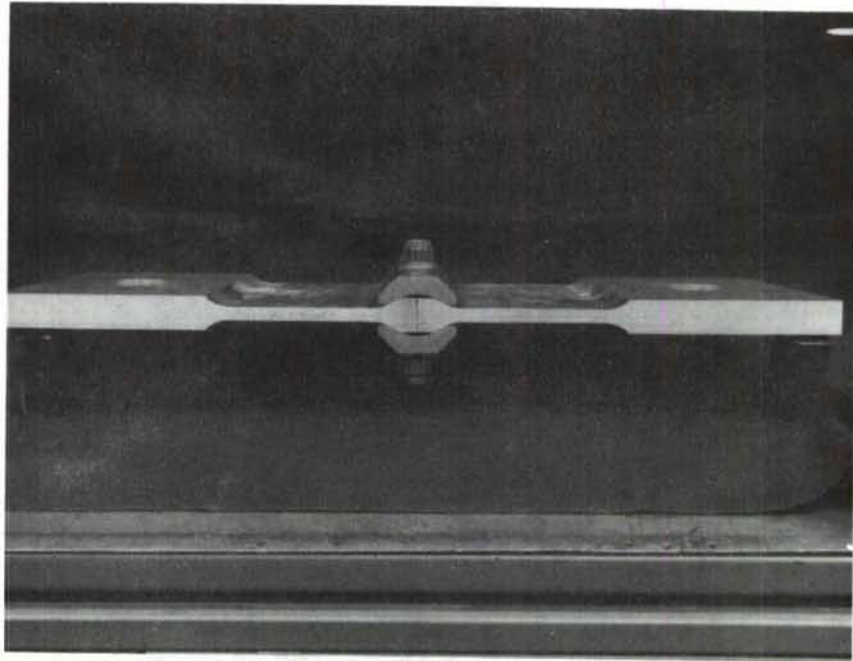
CLAMPED CHORDWISE SPLICE TENSION TEST SPECIMEN (ADP 1005)
